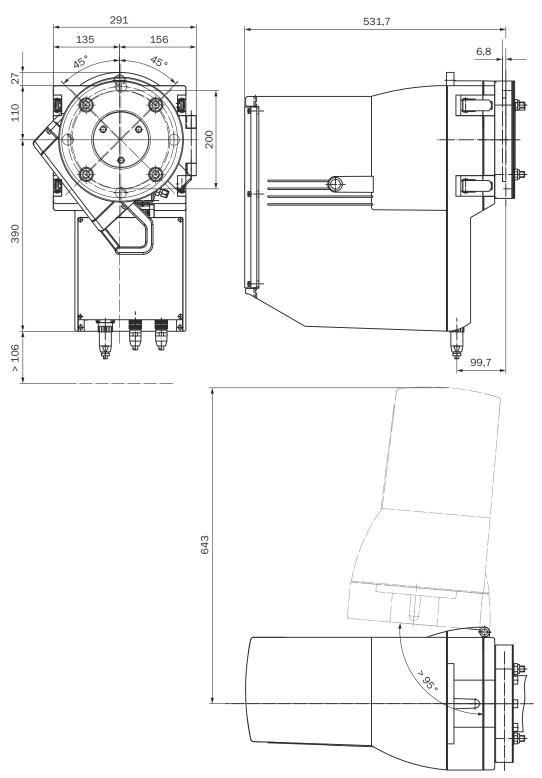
GM35 sender/receiver unit (all dimensions in mm)
